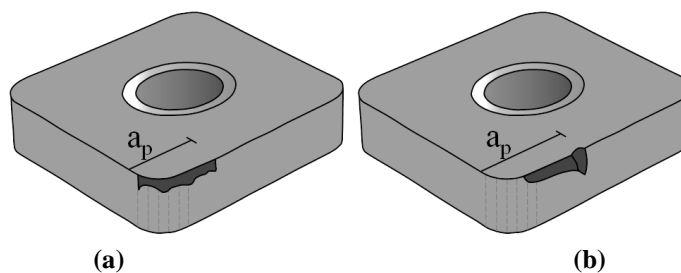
Types of flank wear (a) uniform flank wear across the flank face of the tool (b) localised flank wear or notch wear on the flank face in the region opposite the workpiece surface
